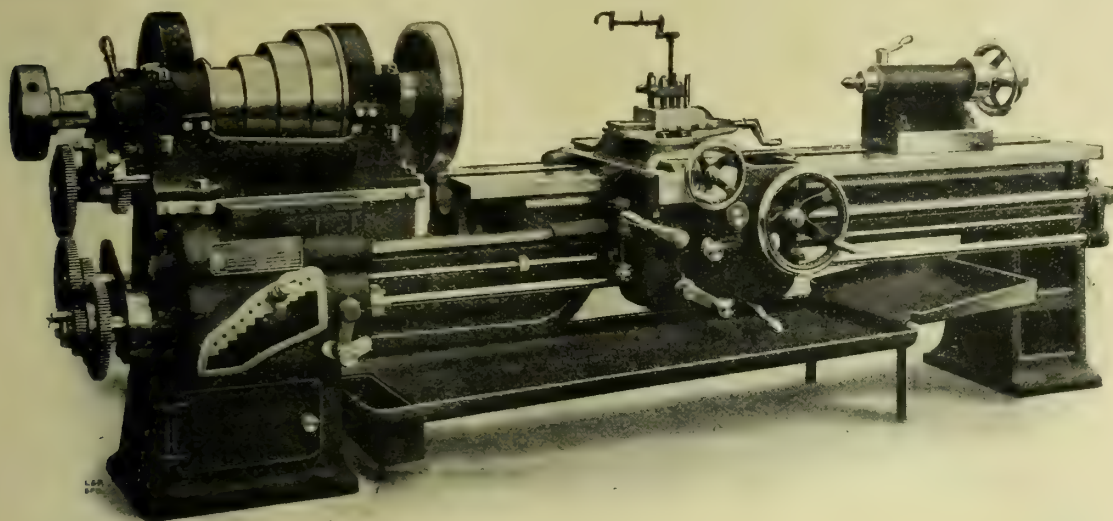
8½ IN. HIGH-SPEED GAP LATHE. MESSRS. DENHAM'S ENGINEERING COMPANY, LTD., HALIFAX.
